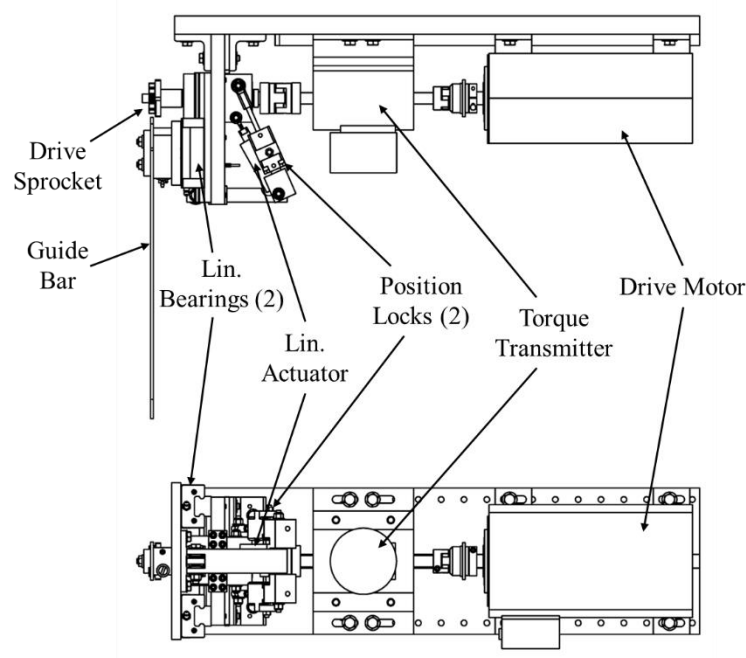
Power head system. Chain tension load cell resides between linear bearings.
